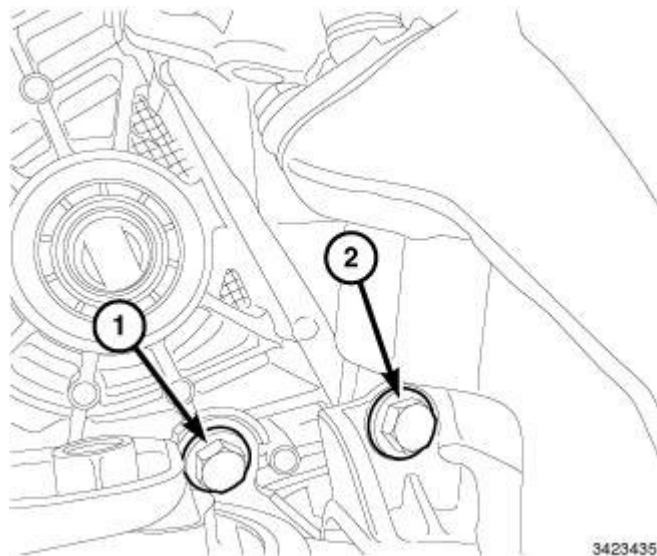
Engine Mount Bracket-To-Transaxle Bolts
